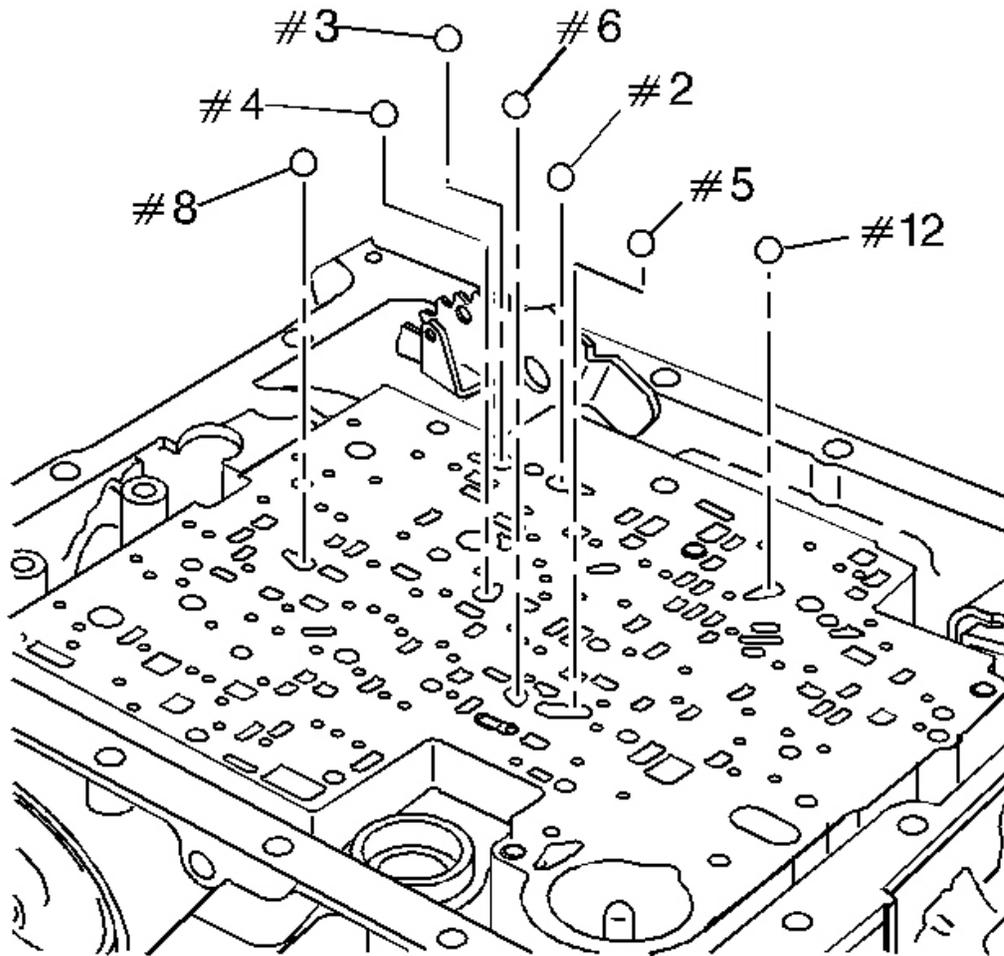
Removing Seven Valve Body Checkballs (2-6, 8, 12)
